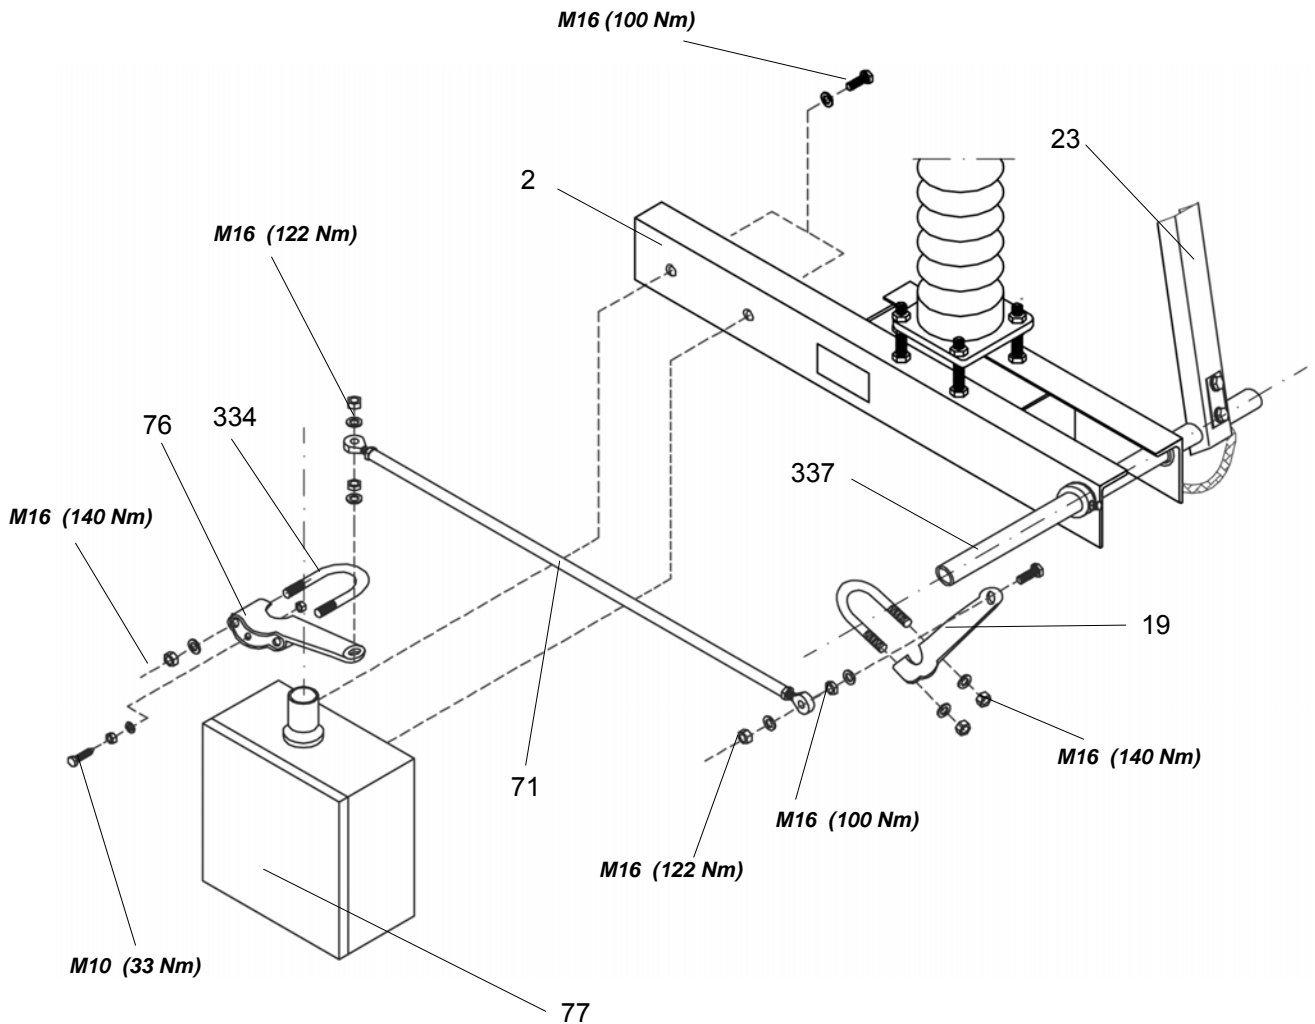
Mounting of operating mechanism for earthing switch: Direct mounting
